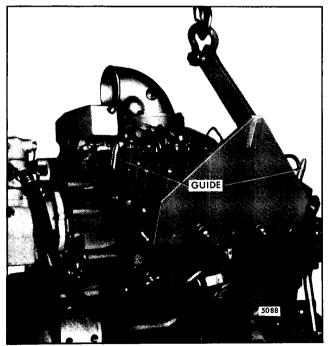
Lifting or Installing Cylinder Head with Tool J 22062-01
